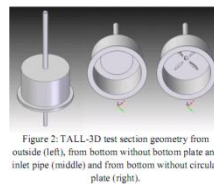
TALL-3D test section geometry from outside (left), from bottom without bottom plate and inlet pipe (middle) and from bottom without circular plate (right).
